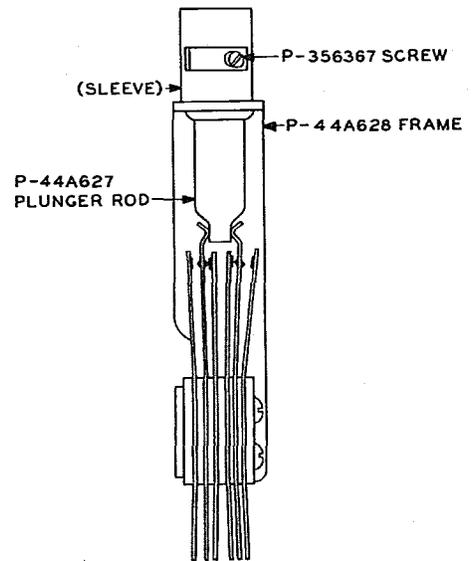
585-type Key Equipped With One-piece Plunger
